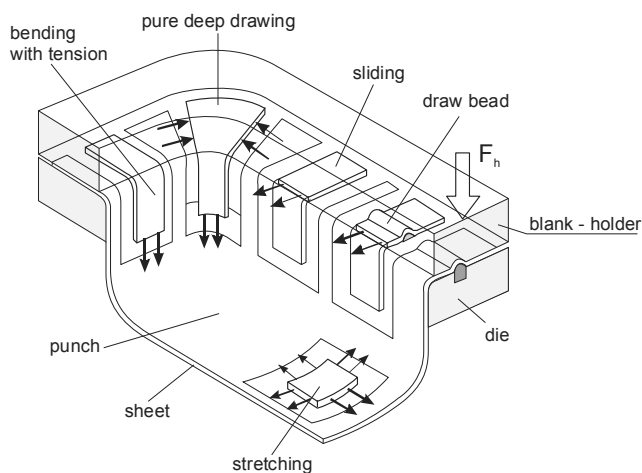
Scheme of physical models at deep drawing of complex geometry parts.
